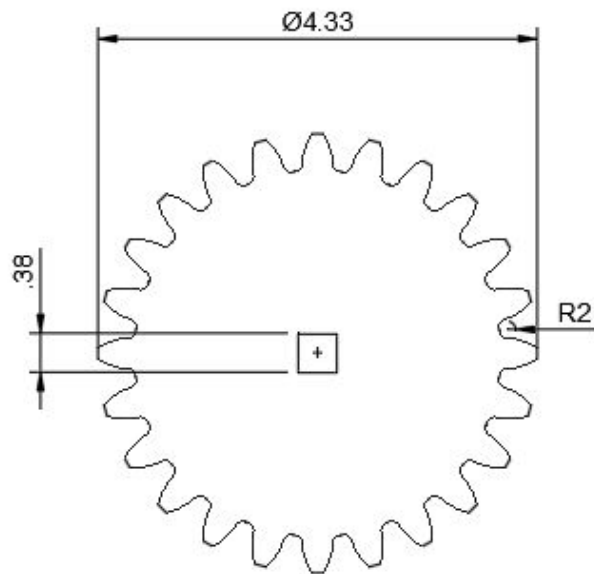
& 2: Sketch generated using Fusion 260 Spur Gear Tool
